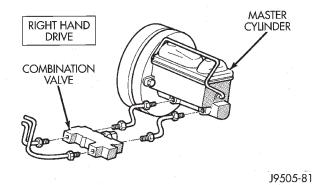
Master Cylinder And Combination Valve (4-Cyl. YJ Models)
